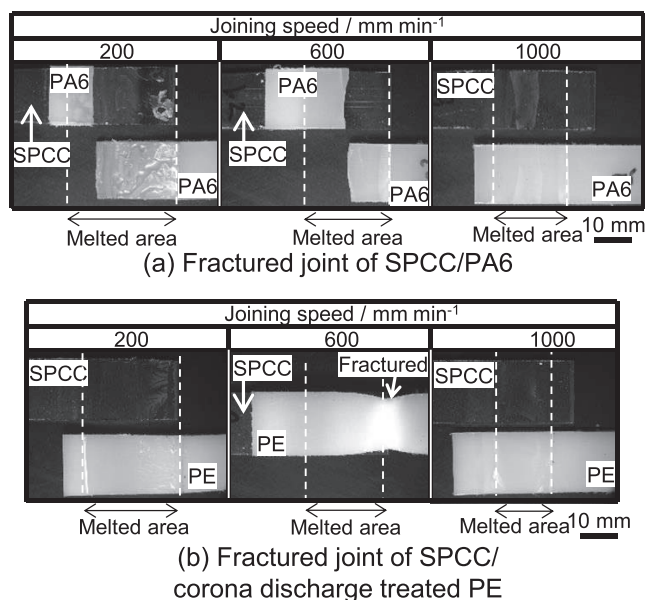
Appearance of fractured joints of (a) SPCC/PA6 and (b) corona-discharge-treated PE after tensile shear test.
